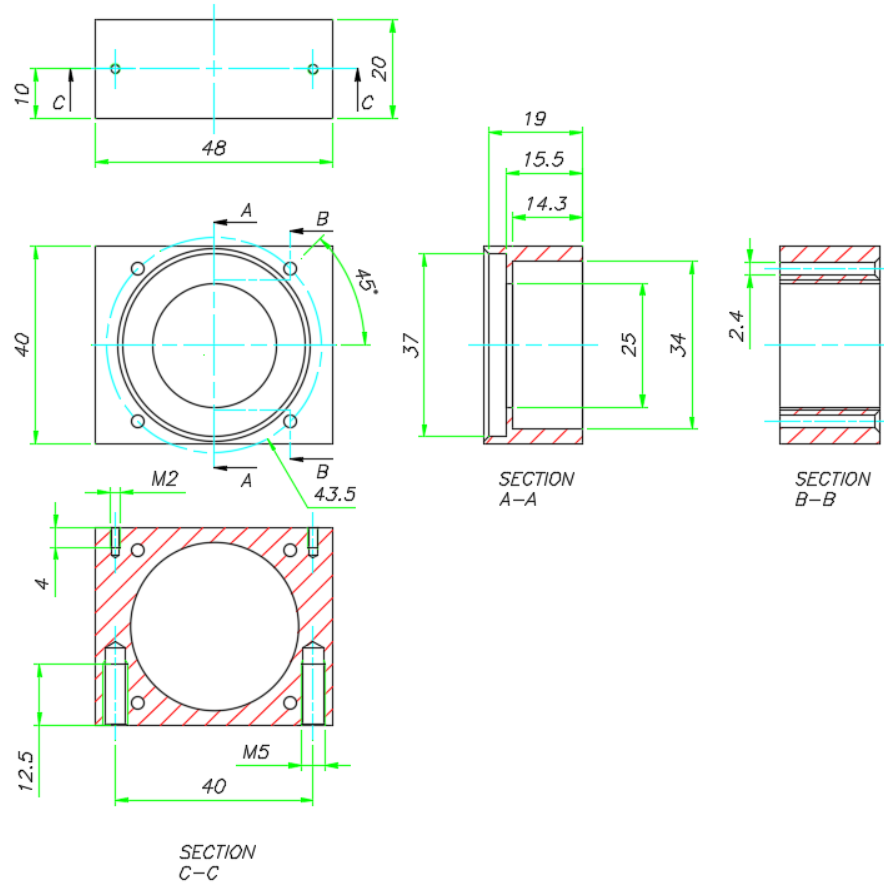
Main views and sections of the housing for the roller bearing and wheel shaft
